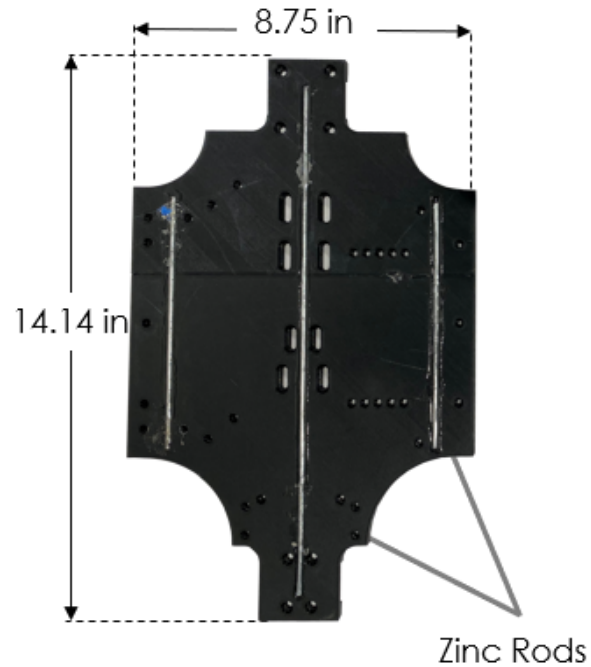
Final Chassis Assembly from the 2019-2020 Car
